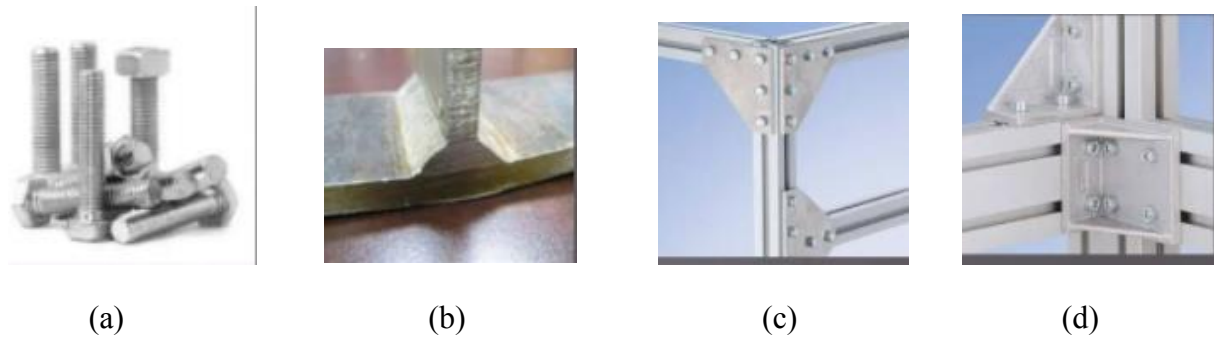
Components of a connection: (a) Bolts (b) Welds (c) Connecting plates (d) Connecting angles (Vayas et al., 2019)
